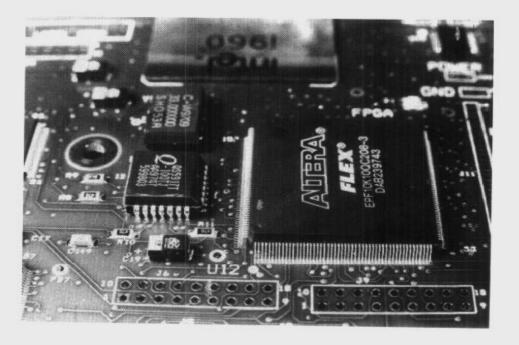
High-performance systems require many packaging styles. This photograph shows a gull-wing QFP (lower right), a J-lead QFP (lower left), and a BGA (top).
